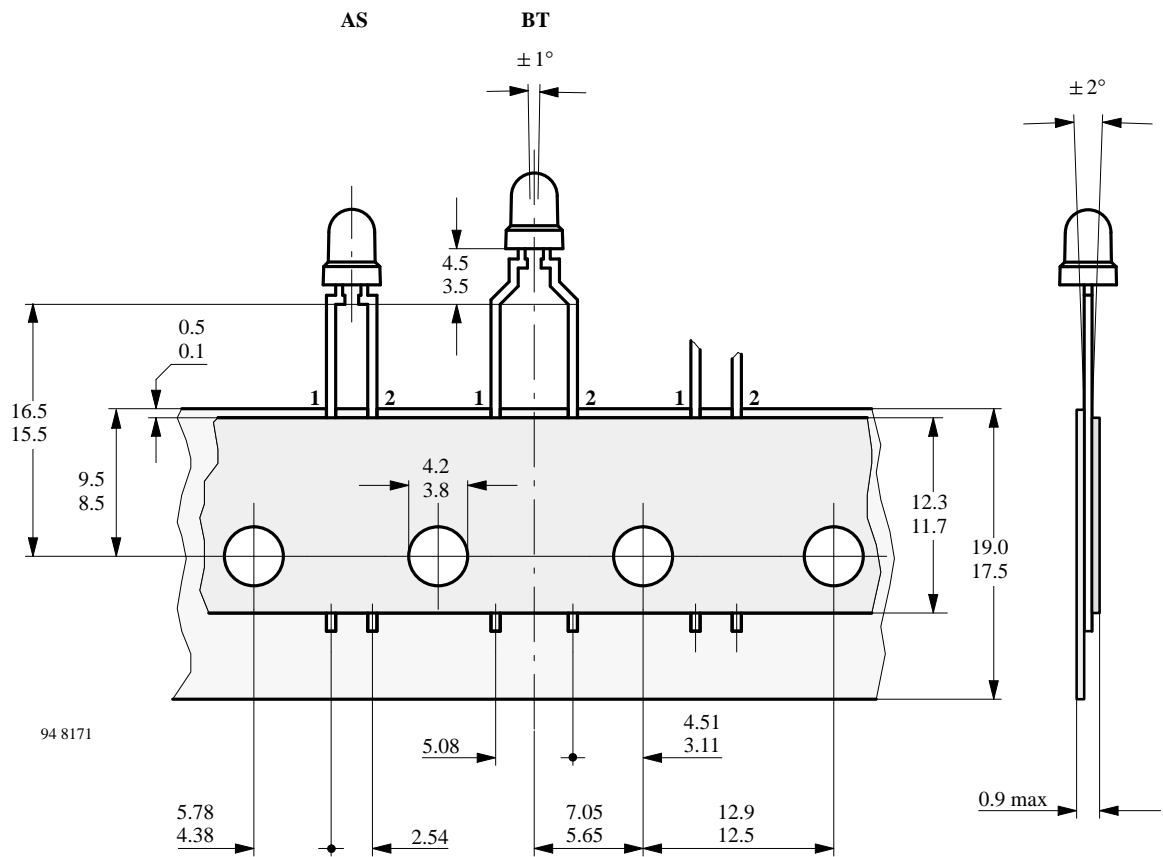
Tape dimensions  $\varnothing$  3mm devices
